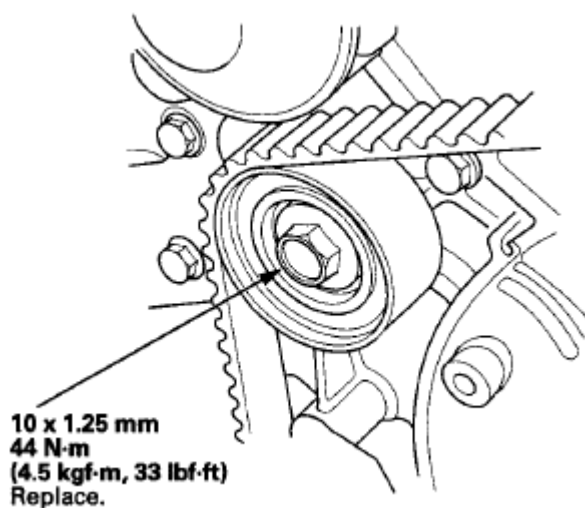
Identifying Idler Pulley Bolt With Torque Specifications
